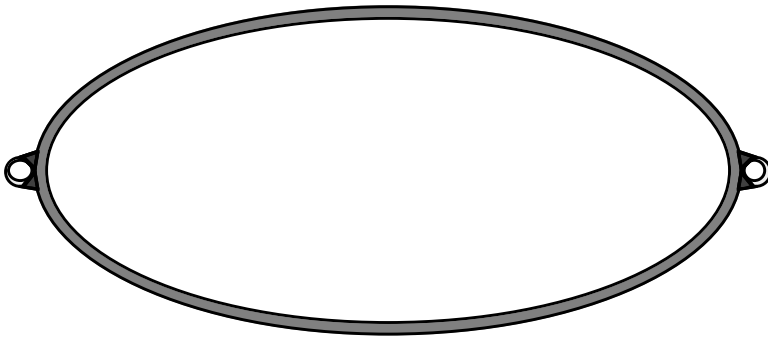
Q1-Q2 vacuum chamber profile. Cooling tubes are welded onto both sides of the chamber.
